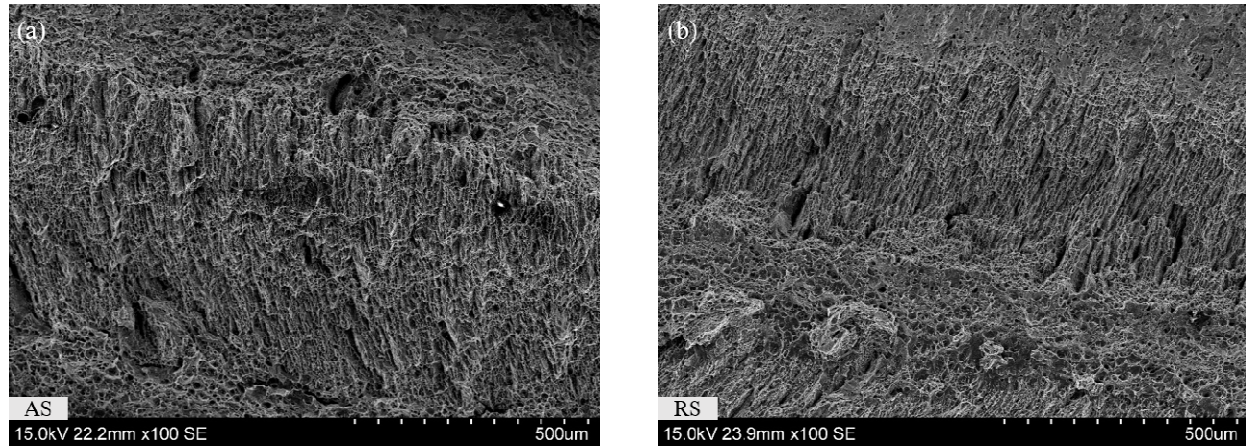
Fracture surfaces of FSW-10 sample showing brittle failure from the NZ.
